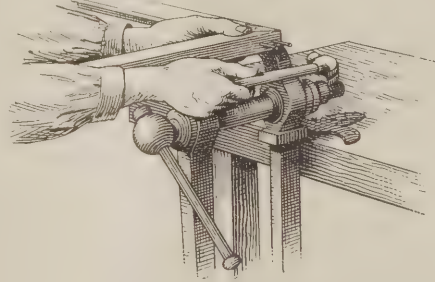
Method of Holding the Molding in the Vise While Driving the Nails.
